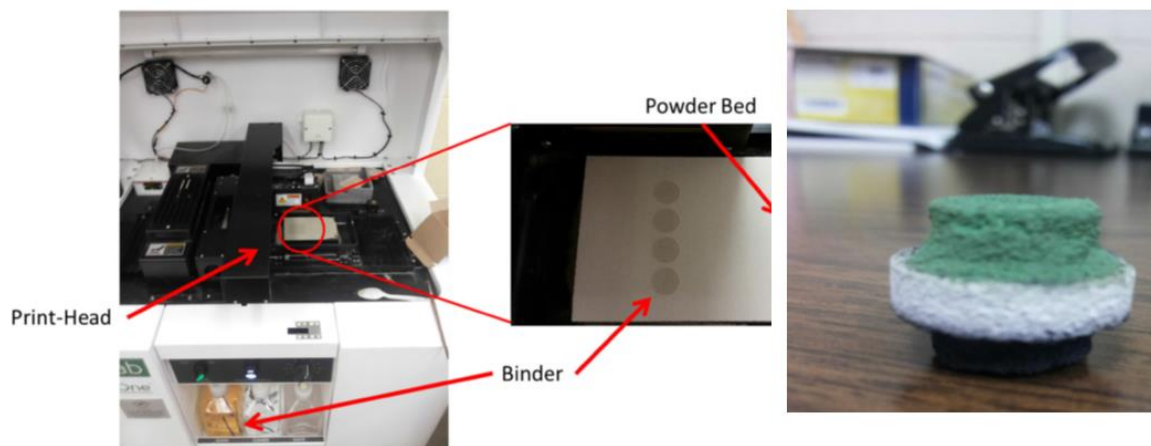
ExOne X1-lab machine (on the left) and the printed SOFC (right). [28]
